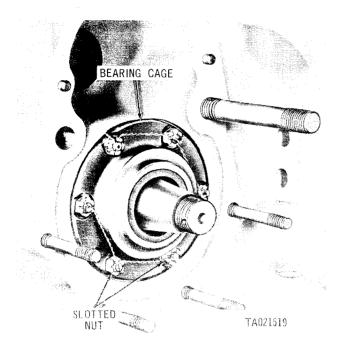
Kemoving or installing starter driven genershaft bearing cage attaching parts.
